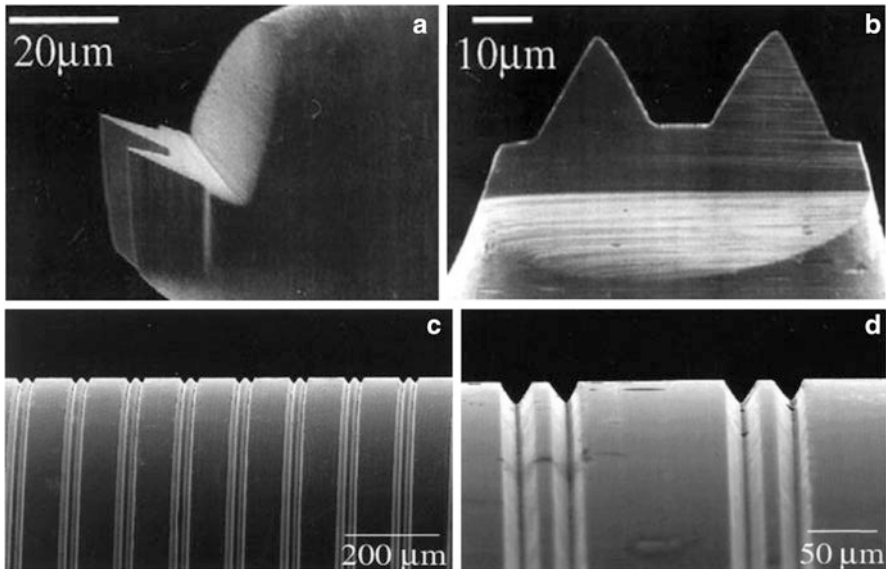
FIB-shaped two-tip micro tool having triangular cutting faces and the machined micro-grooves. (a) and (b) show the tool tips; (c) and (d) show the machined grooves on PEEK workpiece surface by the two-tip tool (Picard et al. 2003)
